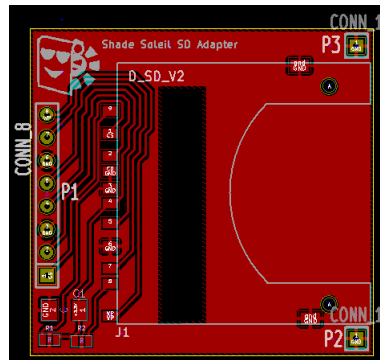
Top PCB layout SD Card Adapter. This board is 10.2x11.8 mm (0.4"x0.465").
